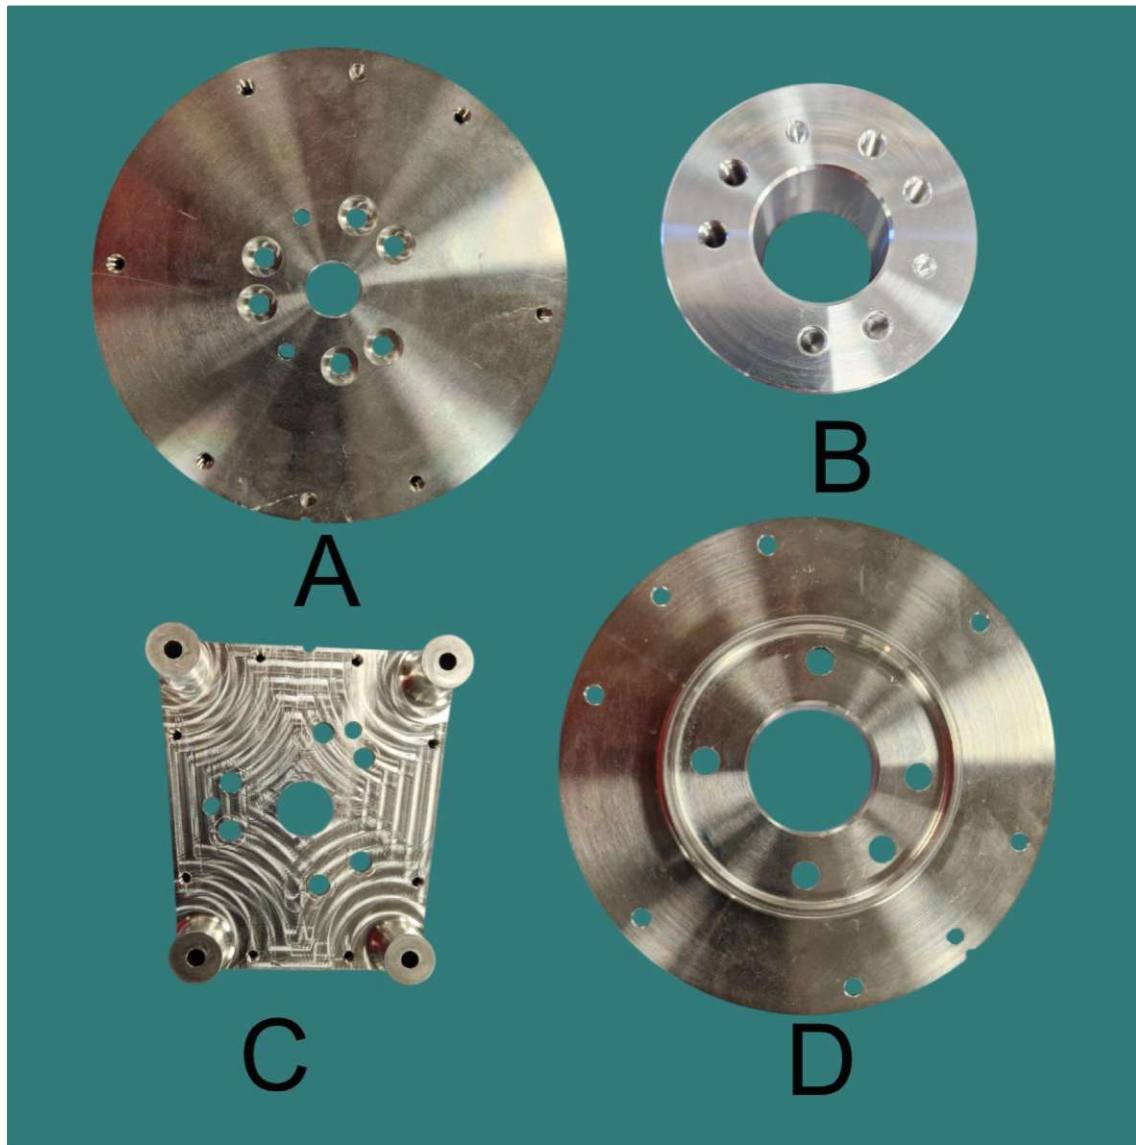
Machined components for the attachment interface, a) flange for the F/T sensor, b) Dummy F/T sensor component, c) Custom top cap for Dewalt tool, d) Doosan robot Joint-6 end-effector flange.
